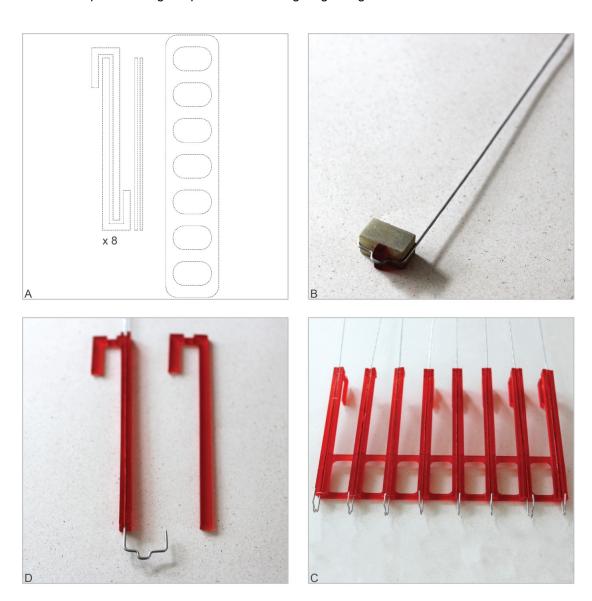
Laser cutting cathode jigs for experiment 05 and 06. A) Components designed in illustrator and laser cut. B) Aluminium wires rolled on sand paper to roughen up its surface as well as straighten the wire. Roughened end then shaped around a jig by hand to ensure all 8 cathode wires are the same dimensions. C) The individual cathode wires are then insulated using electrical heat shrink tubing up to 15mm of the shape cathode wire to prevent growth on those areas. Cathode then placed in the jig, which is then glued together. D) Jig components holding the cathode are then spaced equidistant apart from one another. Aluminium wire total dimensions 8 x 250mm x 1mm diameter.
